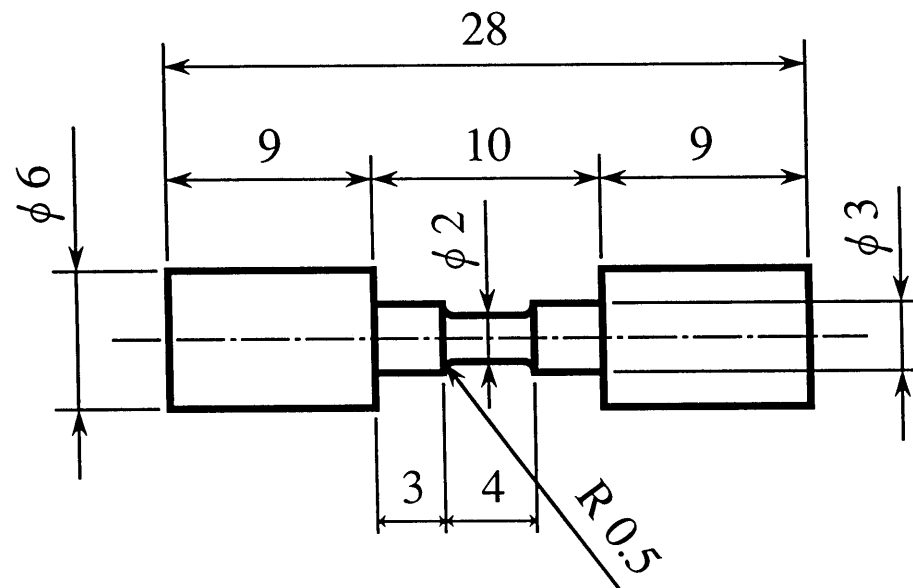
Size of specimen used for the ultra-high vacuum tensile test.
